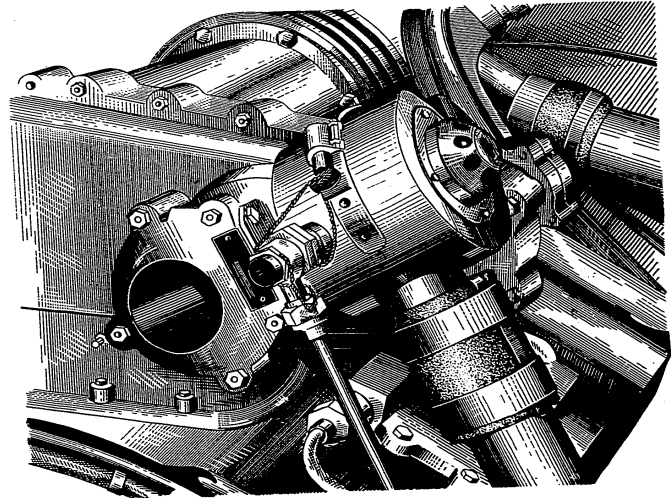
JOINT ON PIPE SUPPLYING COOLING AIR TO COMPRESSORS.
